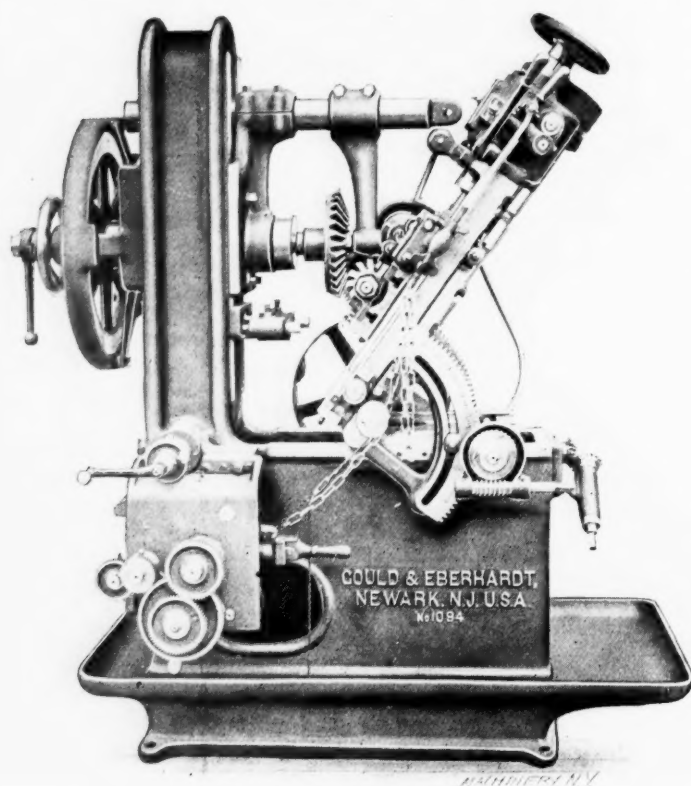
Cutting a Bevel Gear on the Gould & Eberhardt Automatic Machine of the Orthodox Type.
